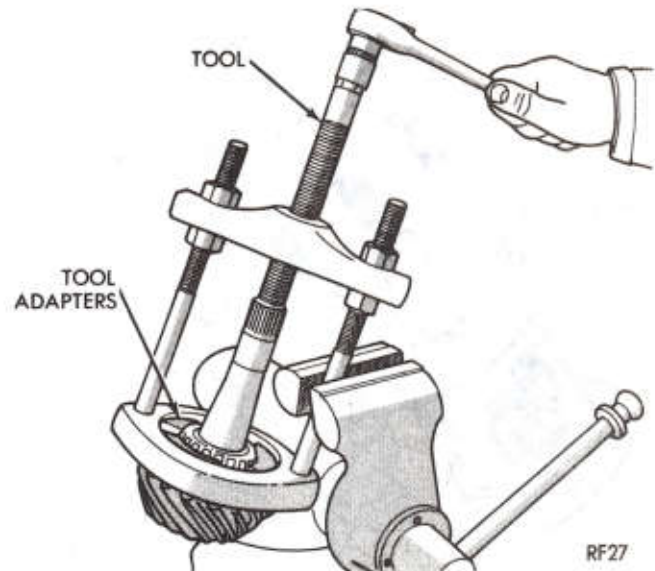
Removing Drive Pinion Rear Bearing Cone
